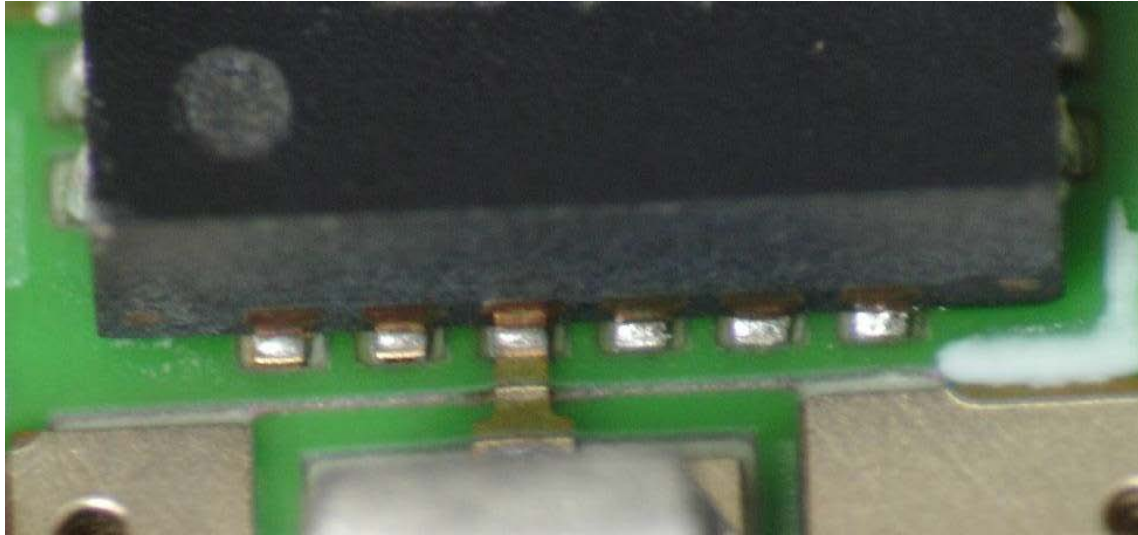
Proper mounting and solder coverage for a 4x4x24 device on a PCB.
